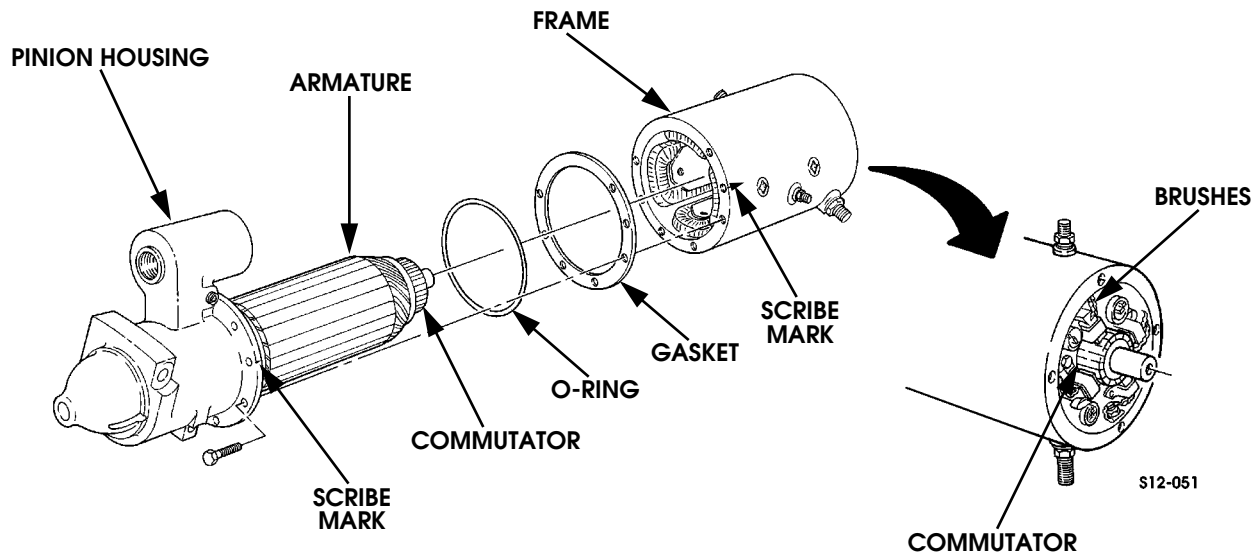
Assembling Frame, Armature, and Pinion Housing
